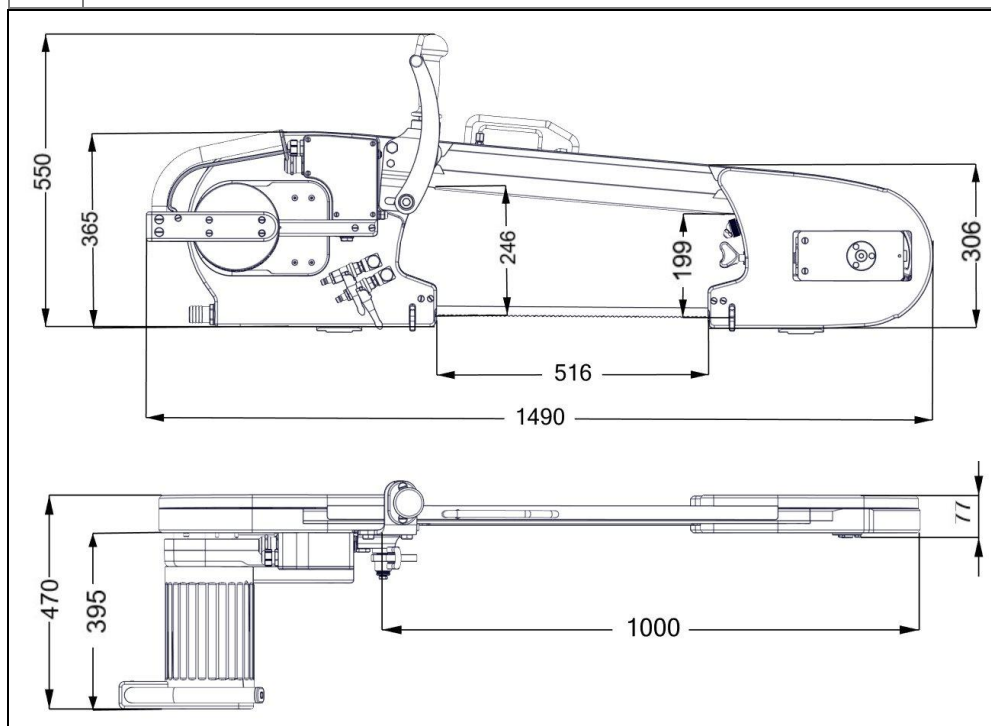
Dimensions WBS51-08nc (specifications in mm)
